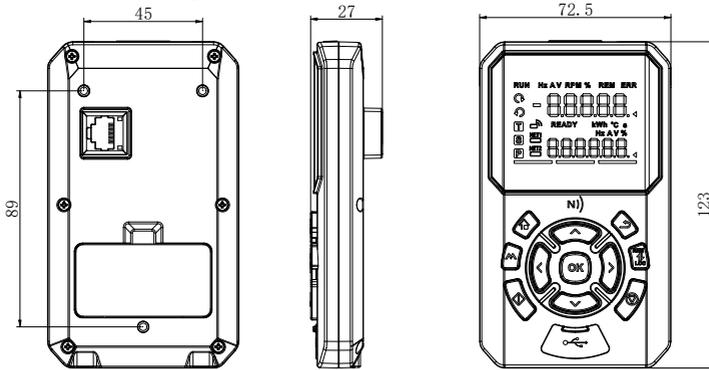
MV820-DP02 appearance and mounting dimensions (unit: mm)
